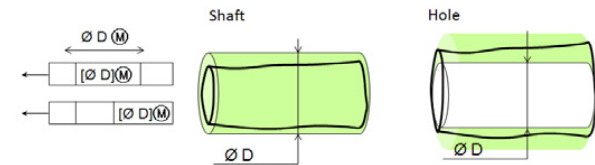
The maximum material tolerance zone for a cylinder
